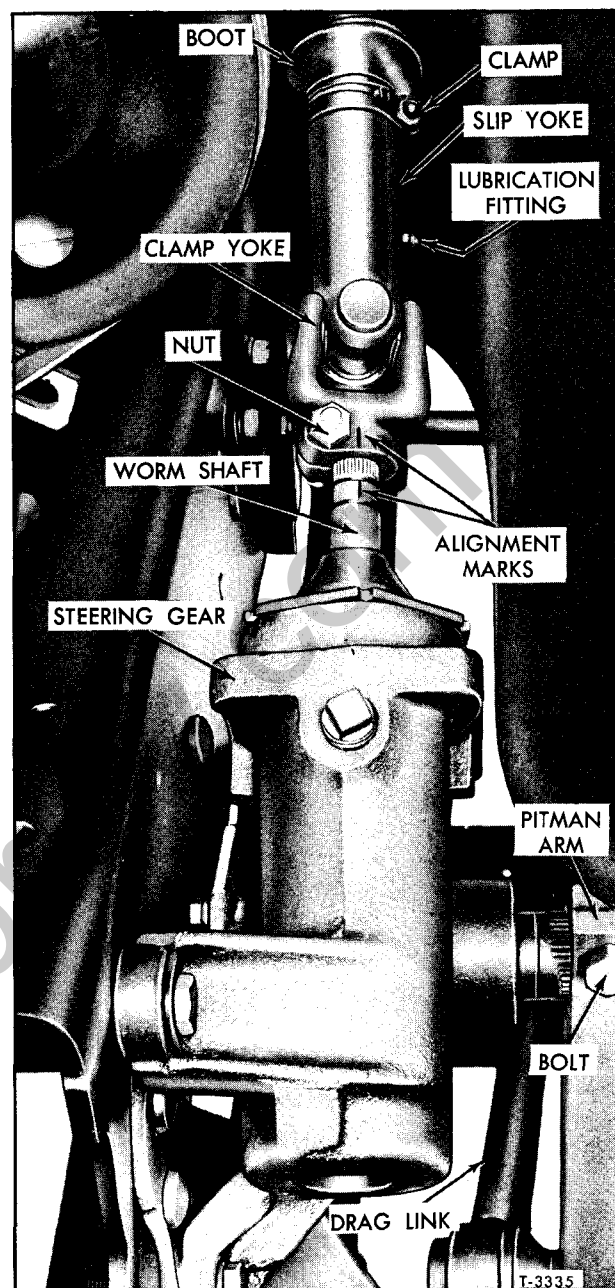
Steering Gear and Intermediate Shaft Installed (Conv. Cab Models) (Typical)
